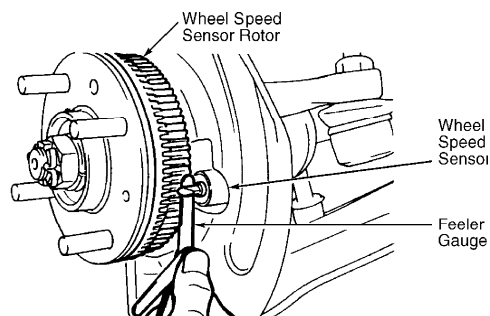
Checking Wheel Speed Sensor-To-Rotor Gap (Typical)
